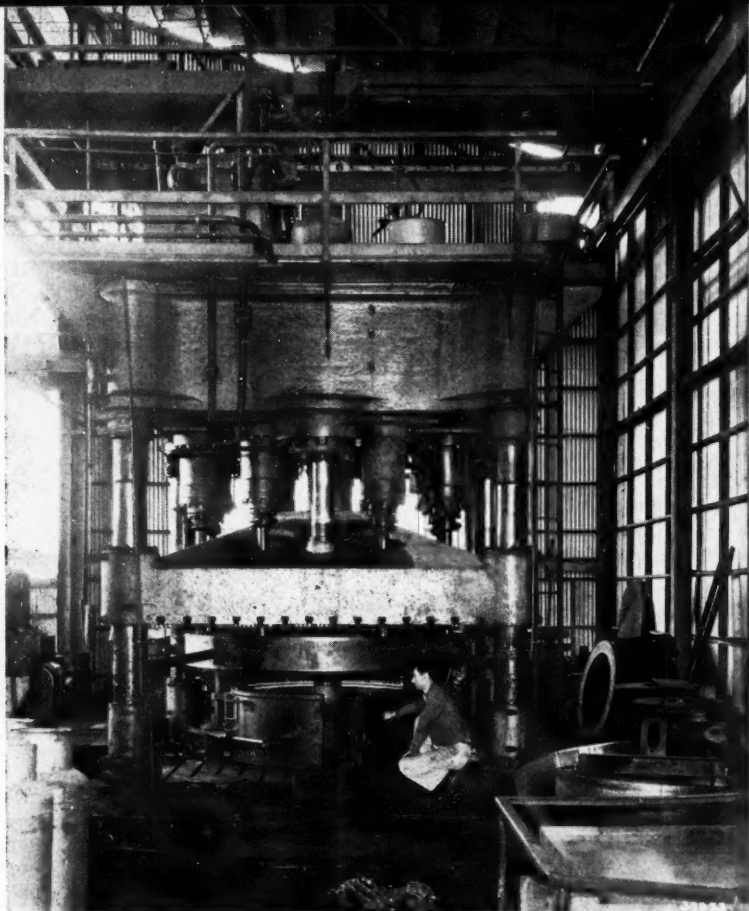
This huge 2000-ton hydraulic press is used to stamp elliptical and hemispherical heads.
